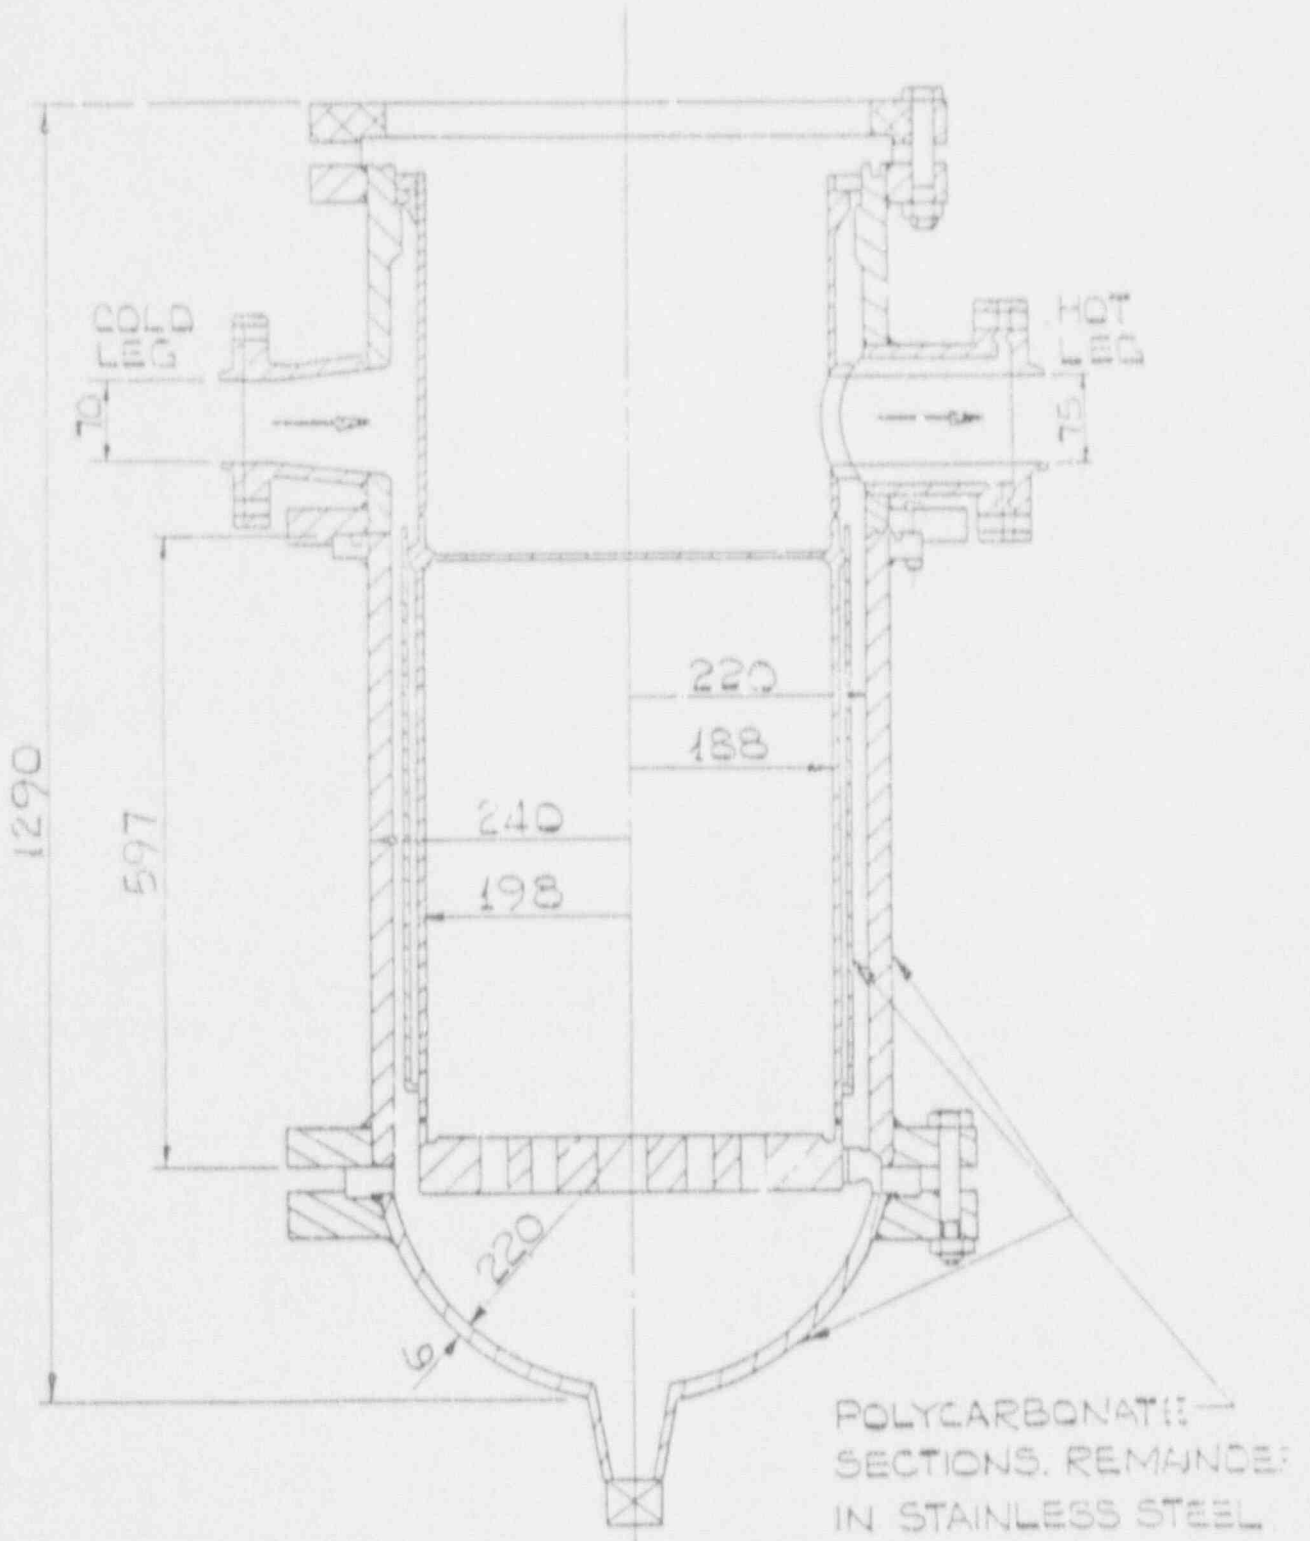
LAYOUT OF NEW PWR TEST RIG
